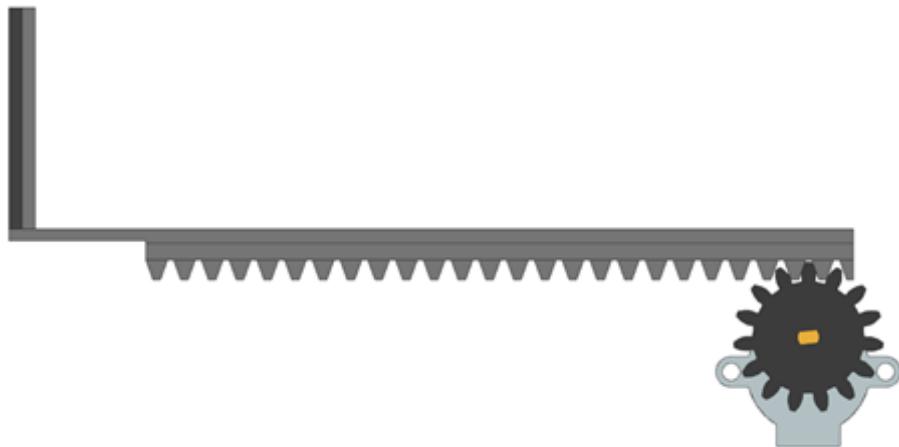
Side view of rack and pinion gear design (Siemens NX)
